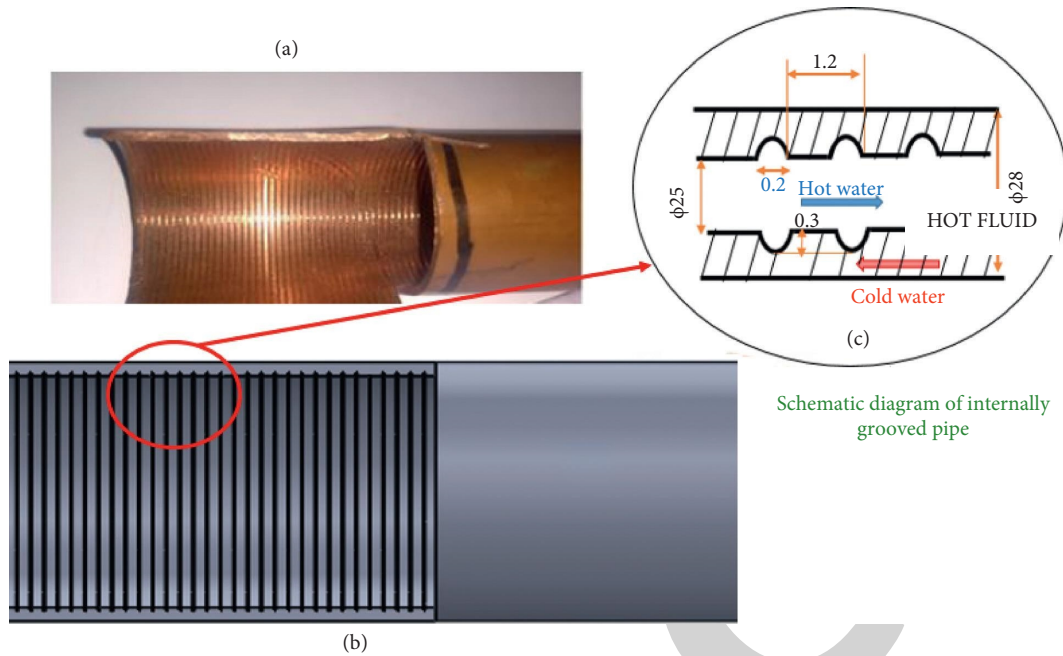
Cut section of internally grooved test section: (a) grooved copper pipe, (b) 3D model of grooved pipe, (c) schematic of groove.
